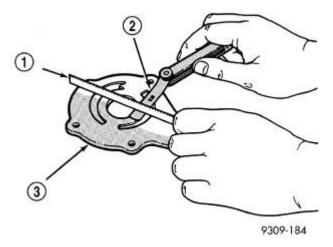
Inserting Feeler Gauge Between Cover Surface & Straightedge Courtesy of CHRYSLER LLC
